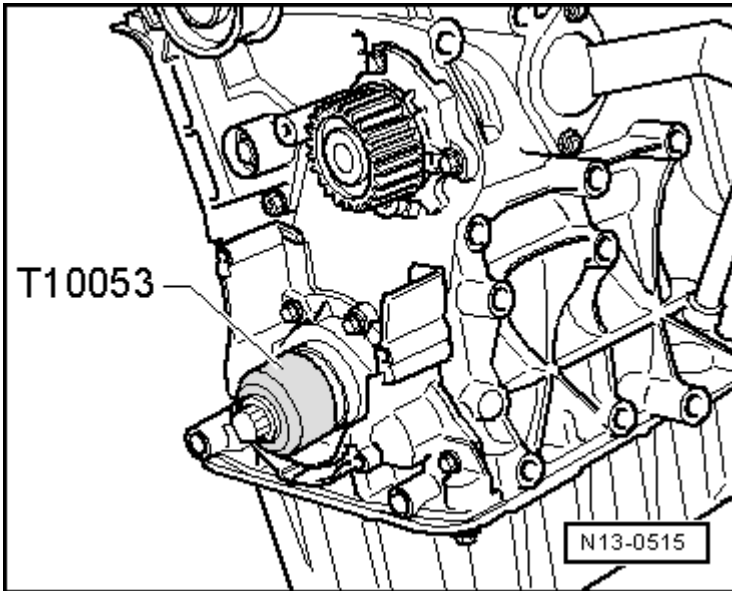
Identifying Press Sleeve T10053 & Bolt Mounted
